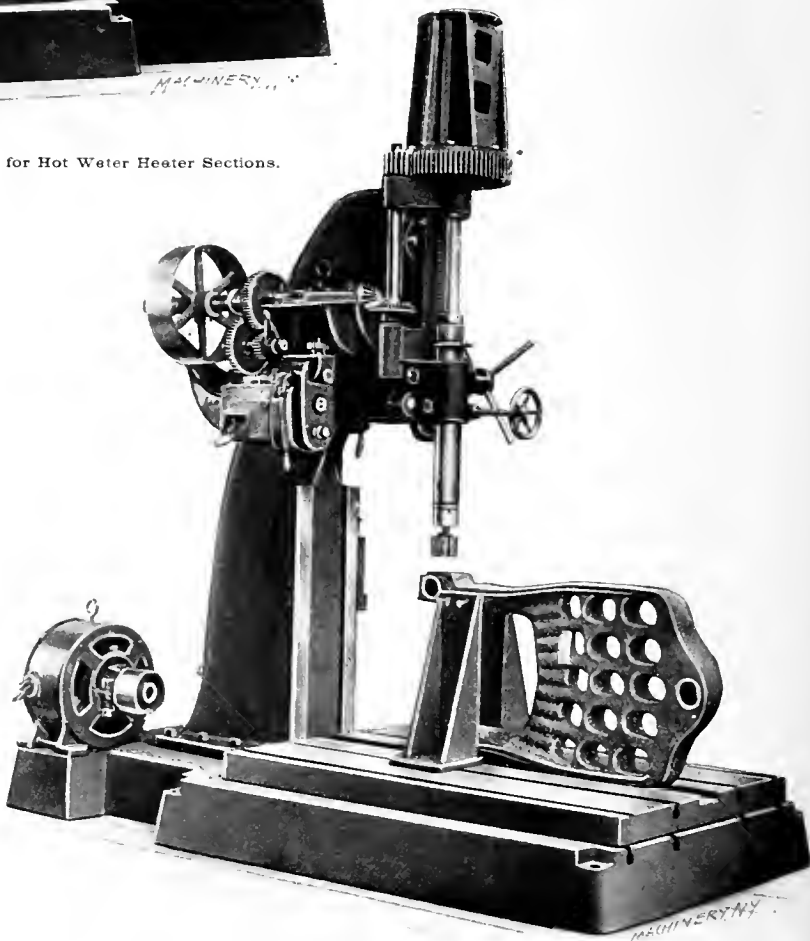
Machine with Revolving Table Removed, and Work Mounted on Lower Rectangular Bed.
